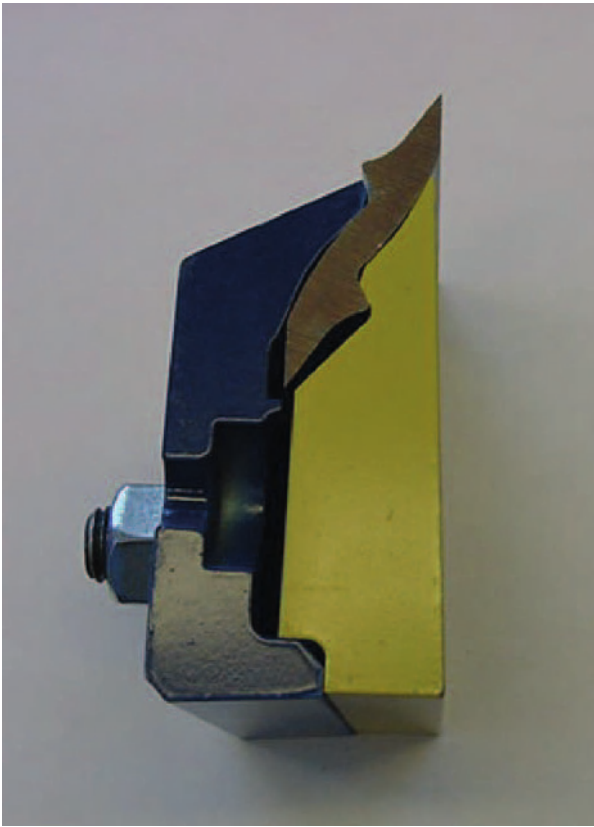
A cut-away section of a disposable chipper knife clamped into a knife holder that is then bolted into the knife pocket. Note the two chipping surfaces that allow the knife to be turned over when one side becomes dull.
